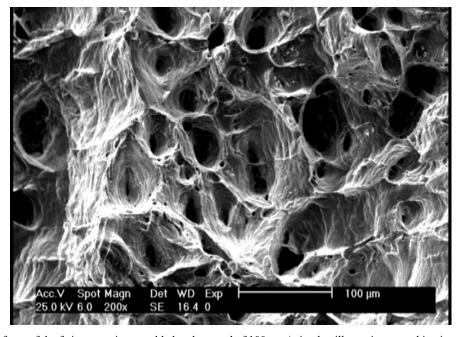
Fracture surfaces of the fatigue specimen welded at the speed of 100 mm/min, that illustrating a combination of both dimple and striations
